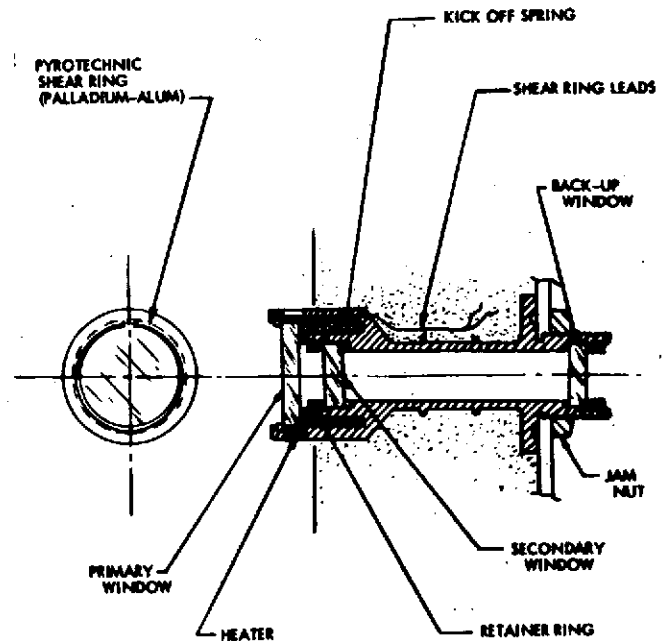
Removable Window (Pyrotechnic Shear Ring)
